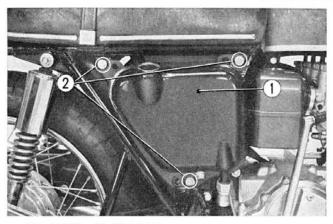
① Oil tank ② Oil tank mounting bolts
